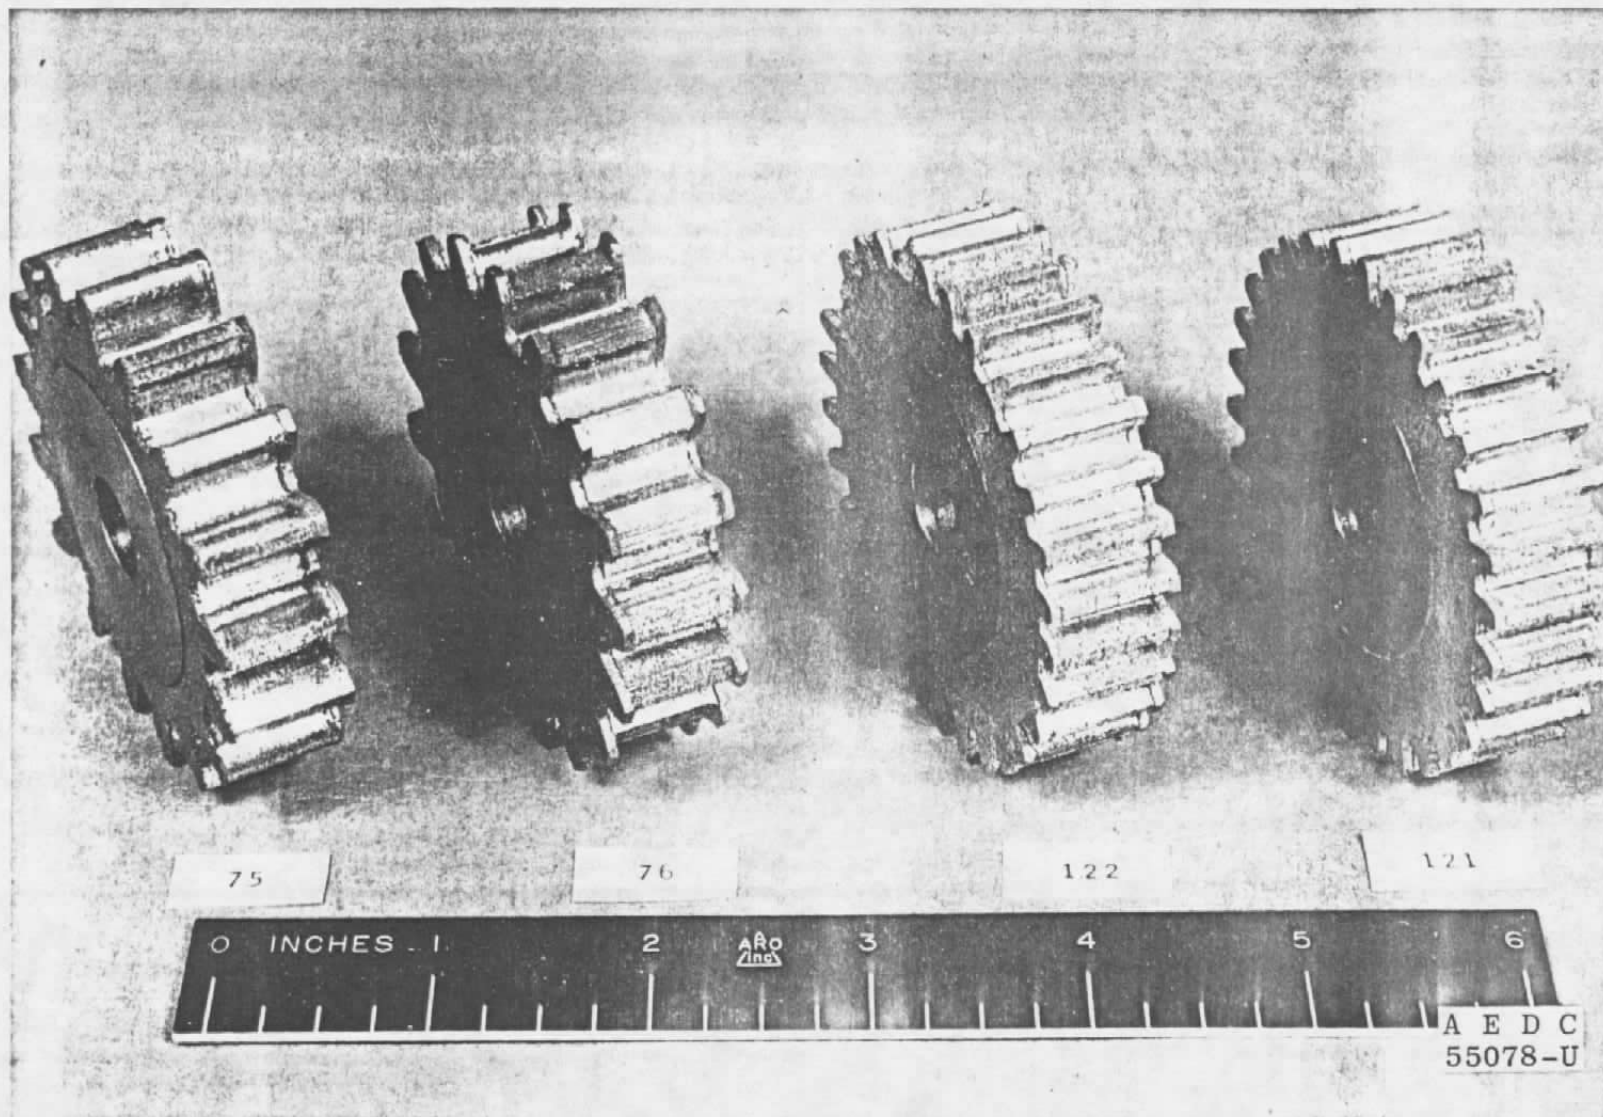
Lubricating Idlers Used in Tests 5A and B
